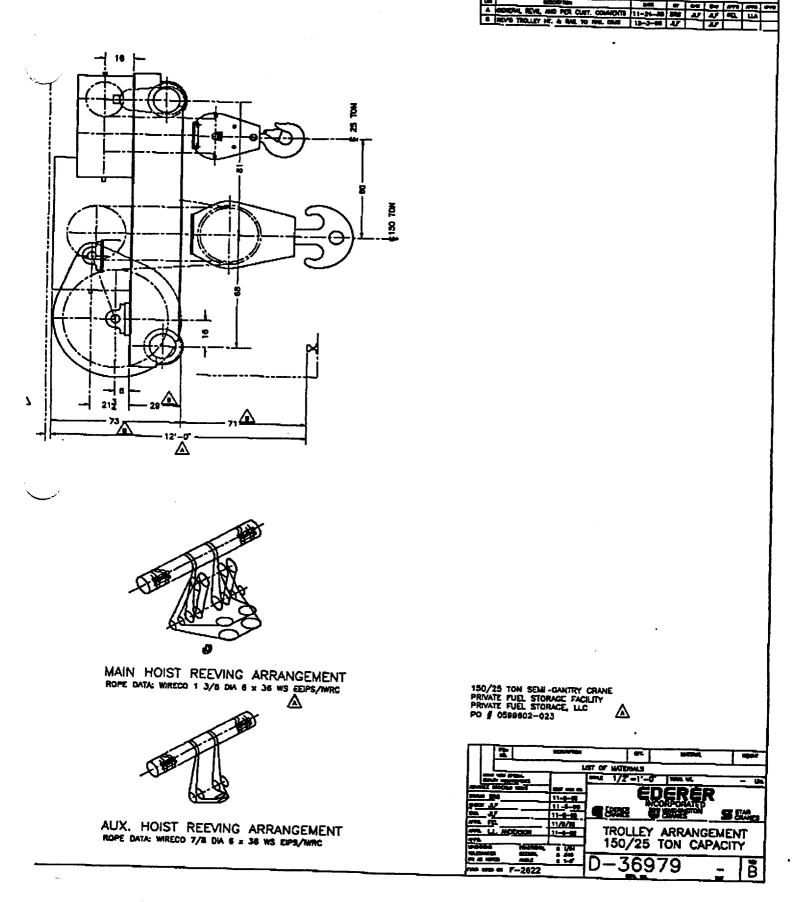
Final Dimensioning for Trolley Arrangement Drawing D-36979, Revision B
